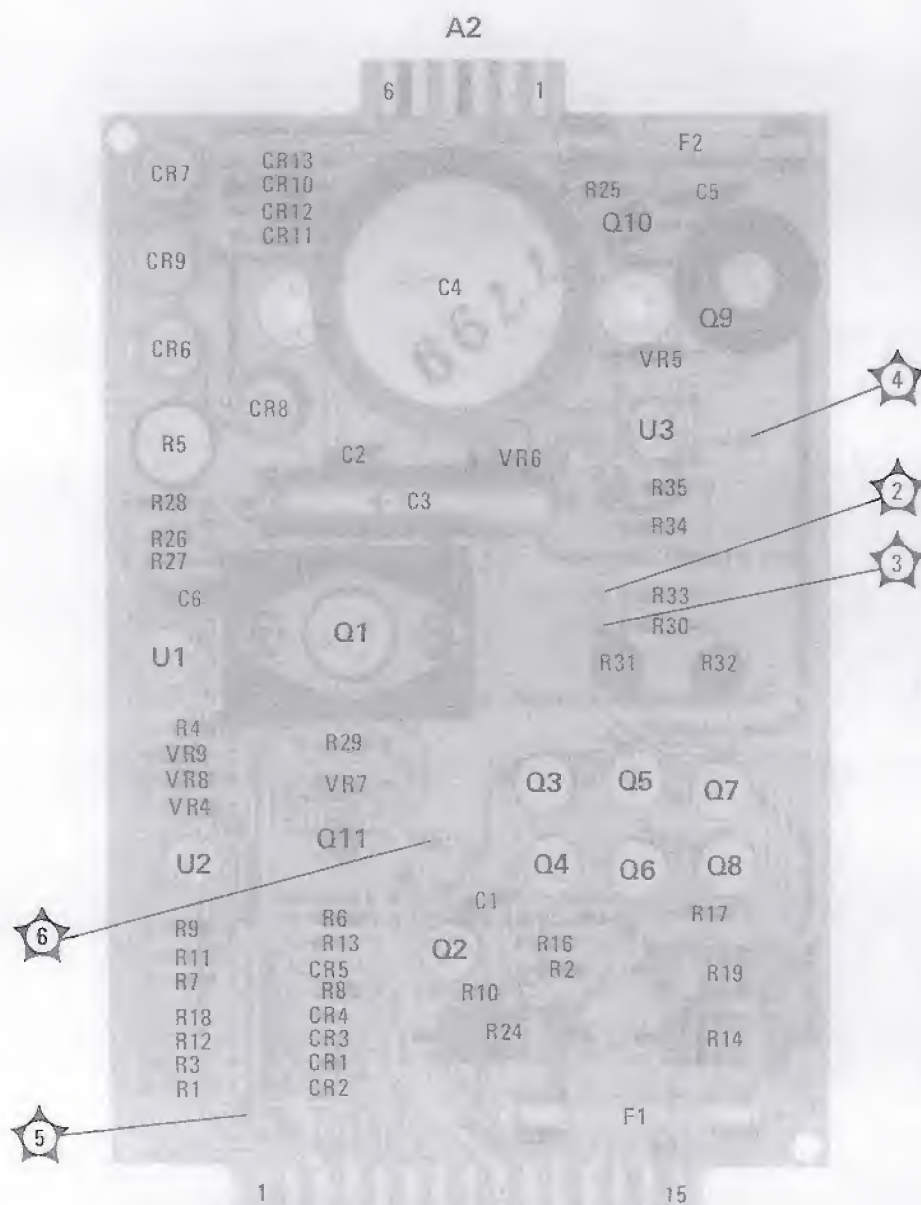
A2 Power Supply Assembly Amplifiers and Switch Driver Circuits Parts Locations
